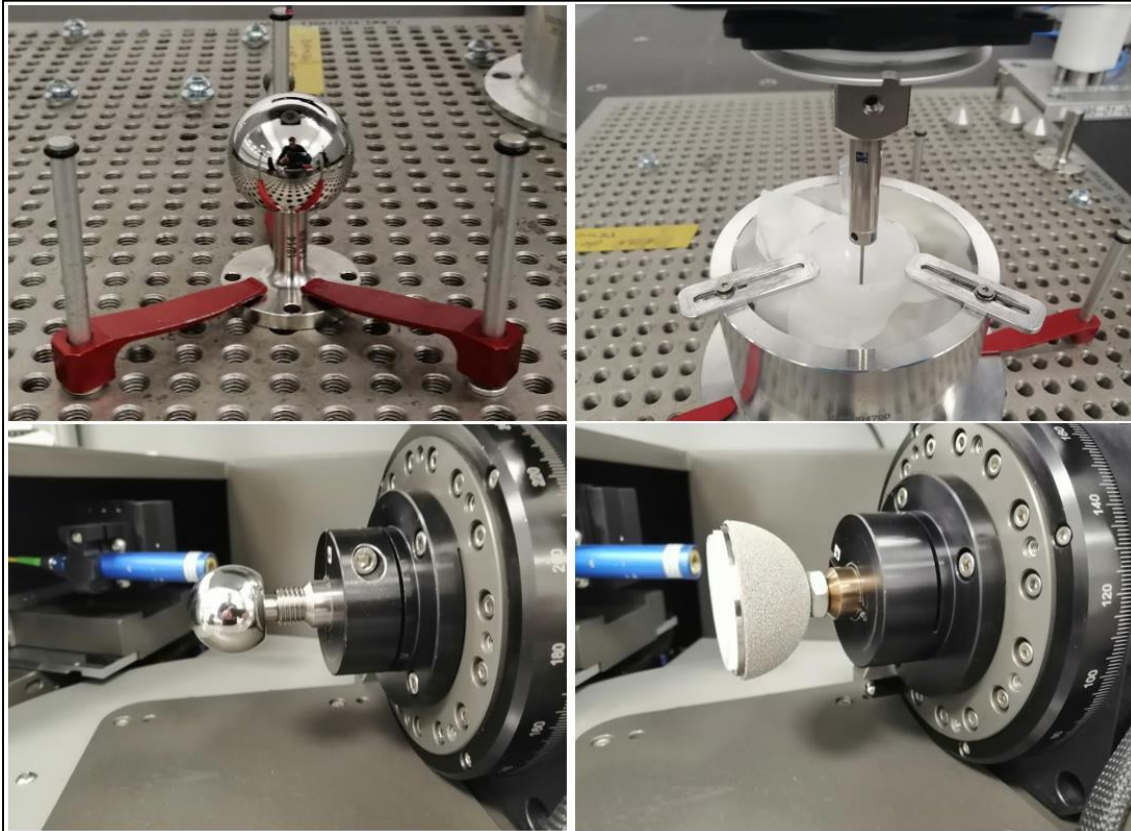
Fixturing setups. Top left: Zeiss CMM femoral head. Top right: Zeiss CMM acetabular liner. Bottom left: RedLux CMM femoral head. Bottom right: Zeiss CMM acetabular liner.
